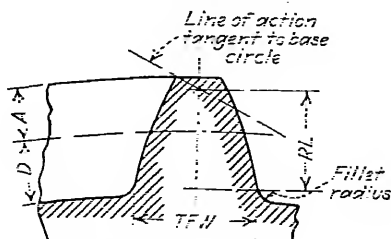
Section of herringbone gear tooth in plane of rotation.
